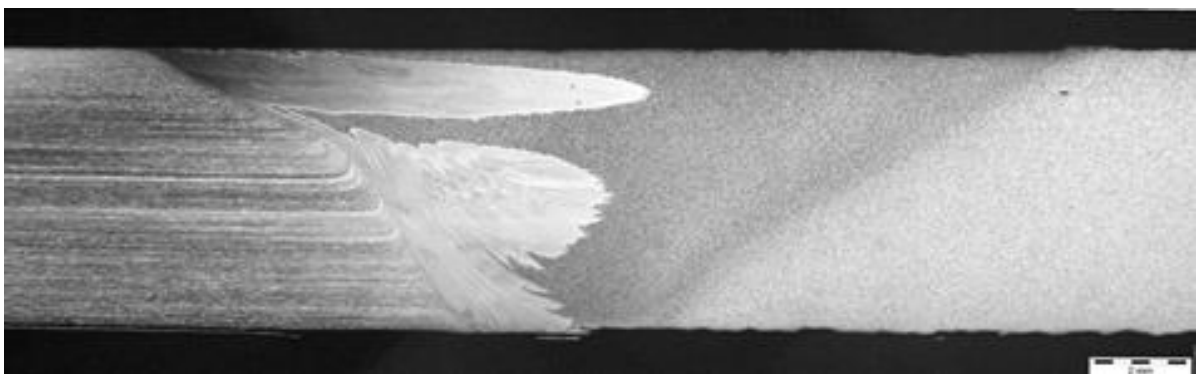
Macrograph of a friction stir butt weld made between Duplex stainless steel (left) and carbon steel, right.
